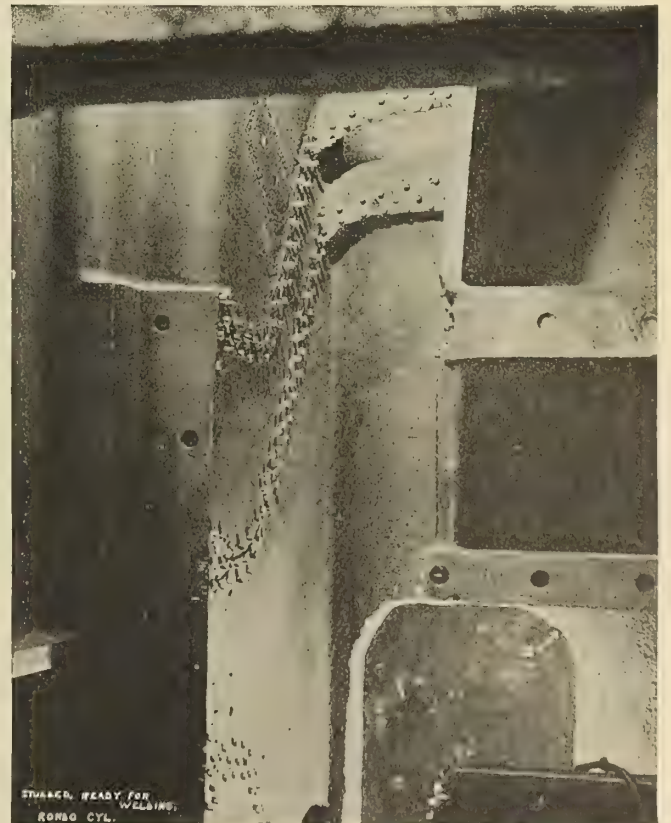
Cylinder Studded, Ready for Welding
